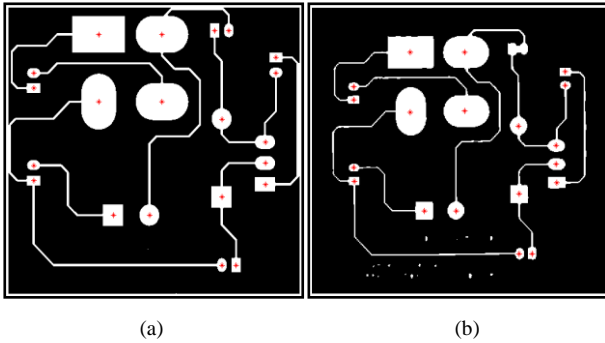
Connected components with centroids (a) PCB layout (b) Defected PCB images
